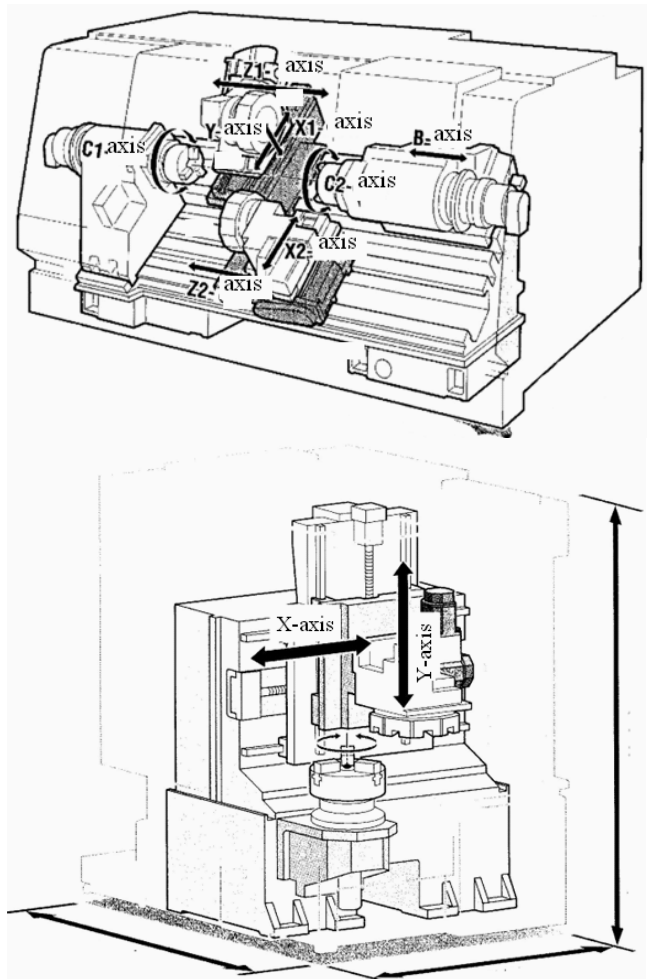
Horizontal turn machine tool with two revolvers, auxiliary spindle and Y axis and vertical turn machine tool
